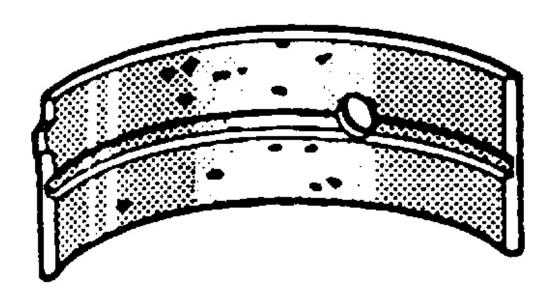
Identifying Crankshaft Bearing Craters Or Pockets Courtesy of GENERAL MOTORS CORP.
